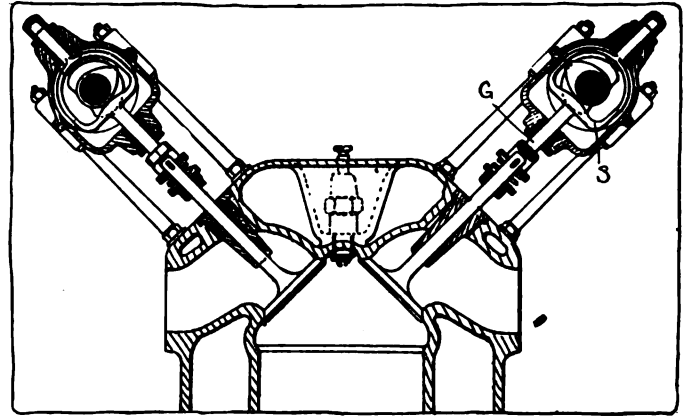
Delage arrangement with sixteen inclined overhead valves operated by cams.
